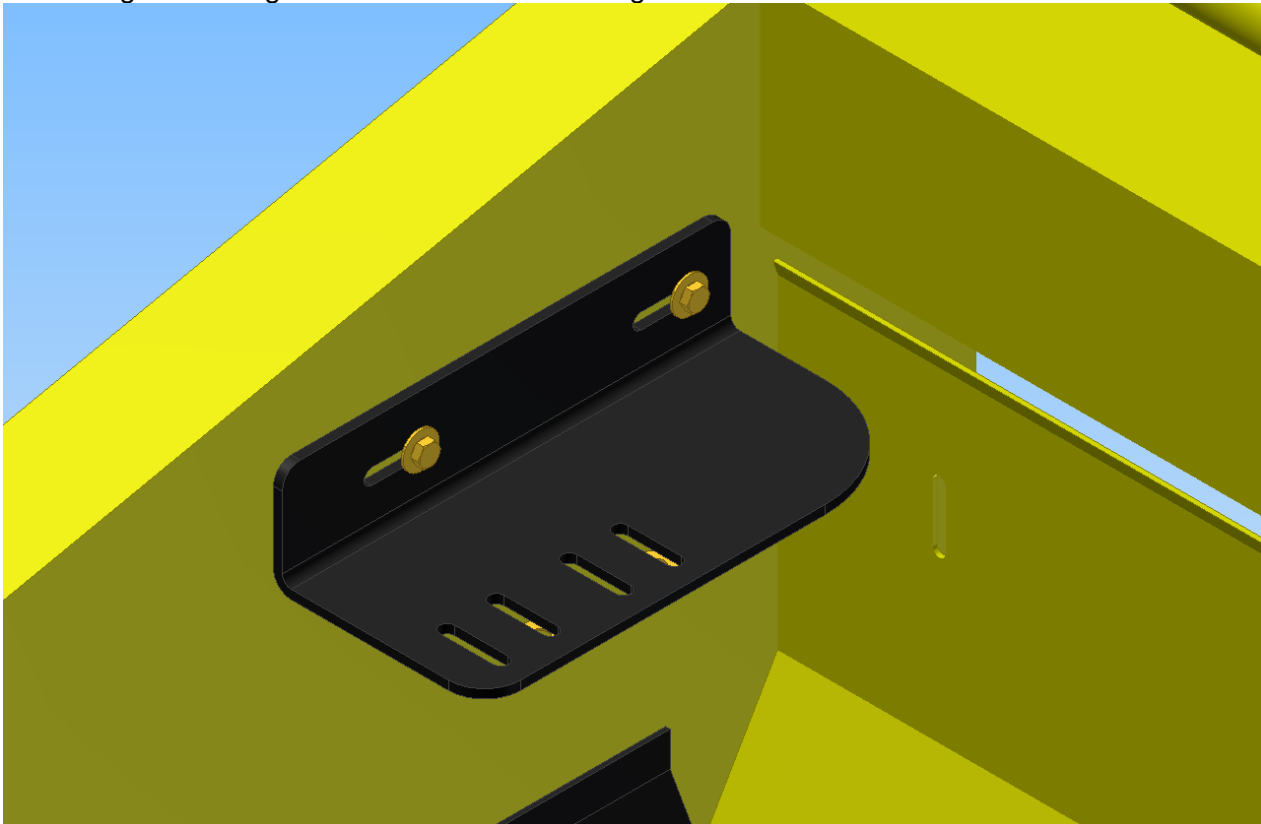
NEW HOLLAND RH END MOUNT 406624
